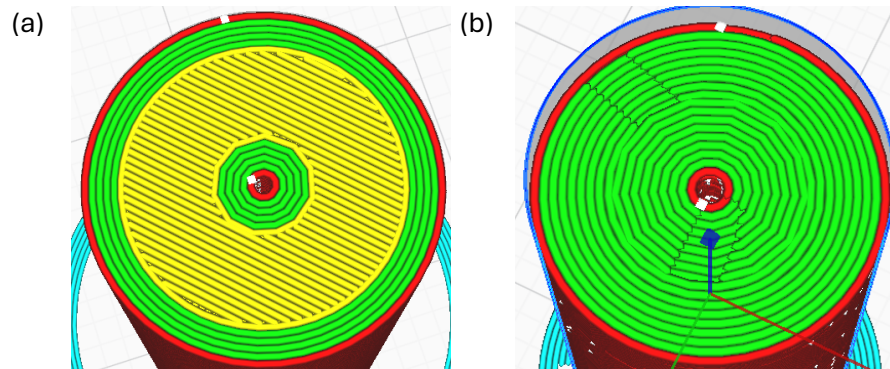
difference between specimen with five walls (a) and specimen consisting entirely of walls (b)
